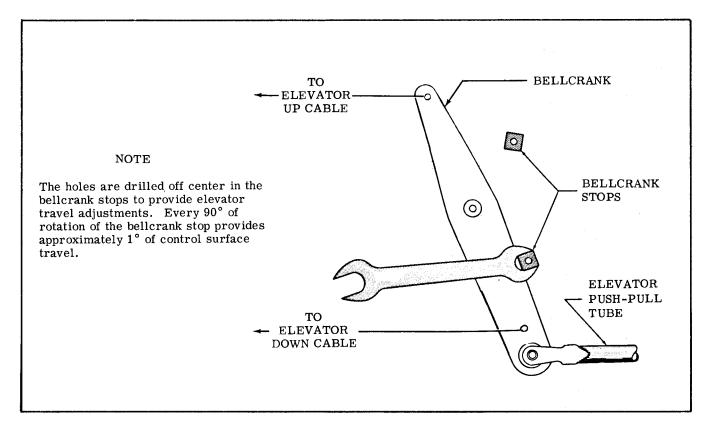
Travel Stops on Elevator Rear Bellcrank
